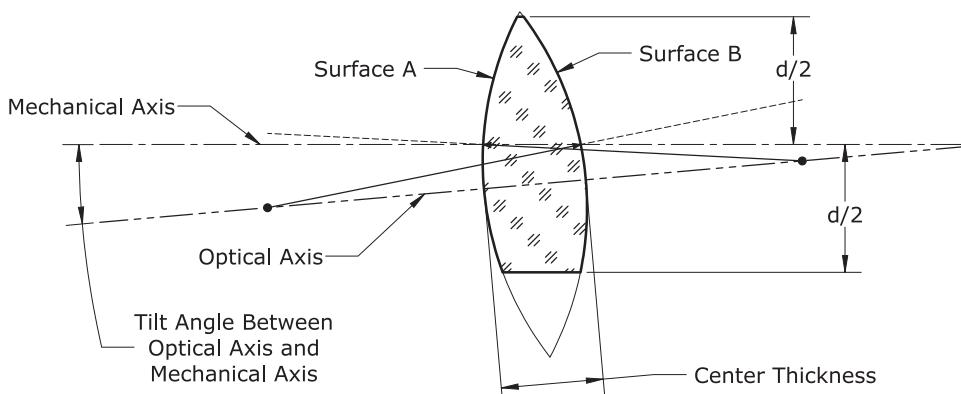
Drawing of tilt between two optical surfaces for fabricating an optical element.
